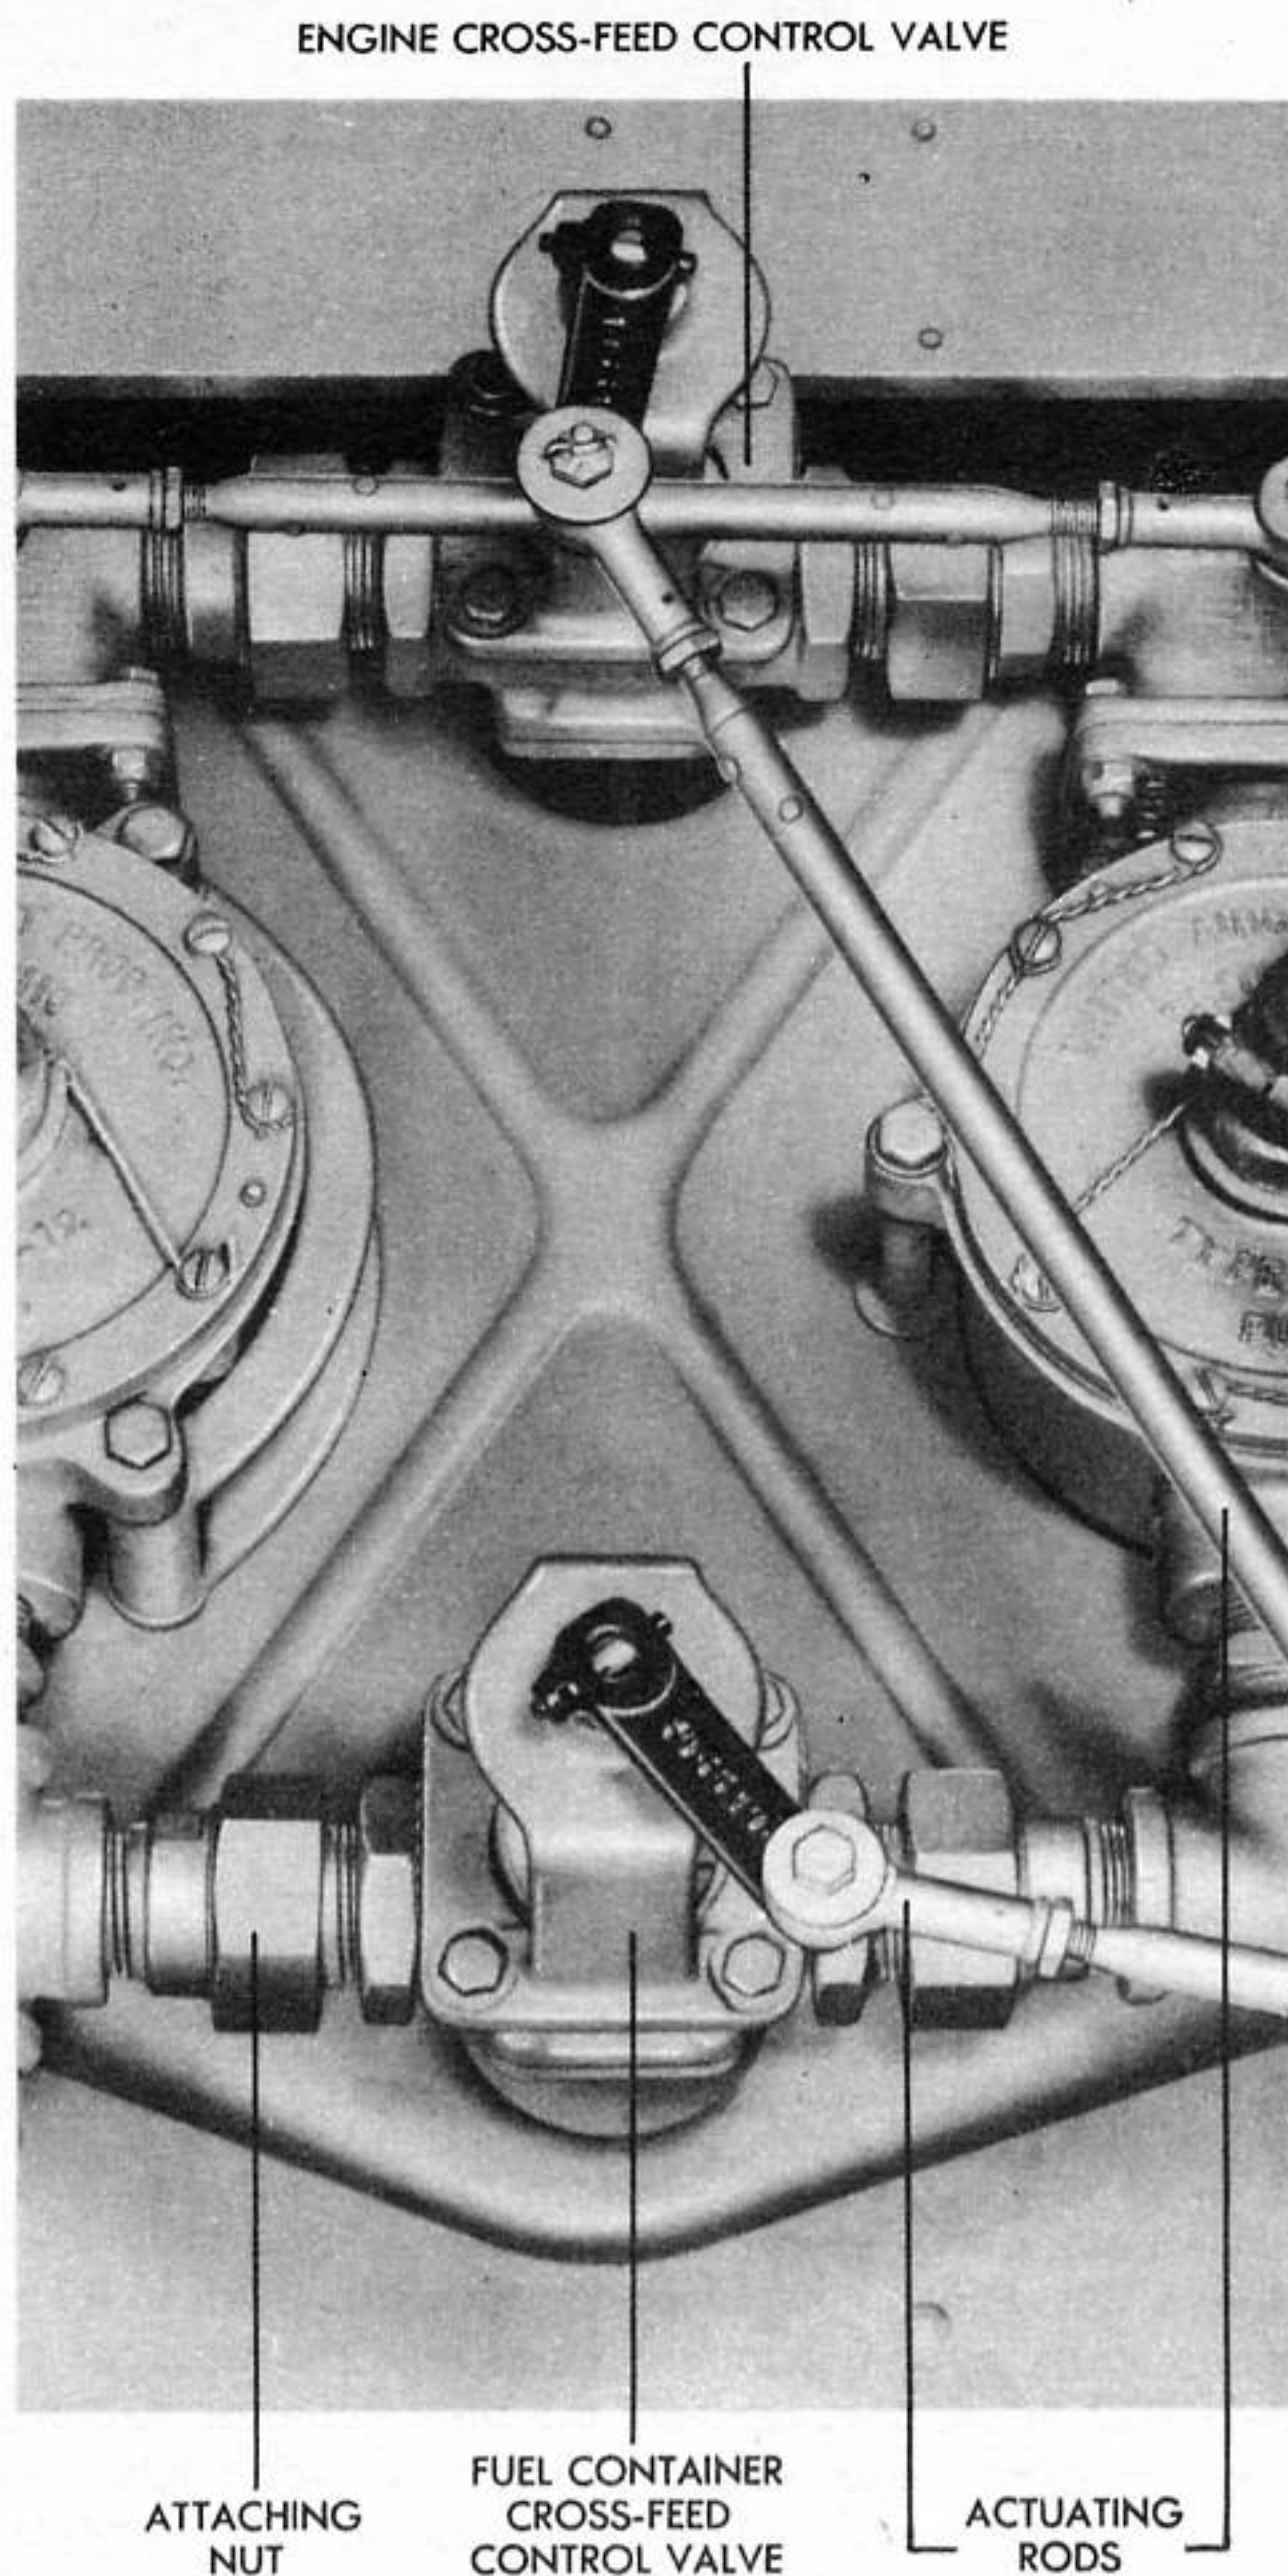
INSTALLED CROSS-FEED CONTROL VALVES
